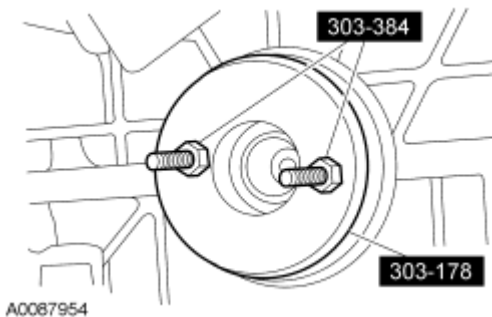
Identifying Special Tools (303-384 And 303-178)
